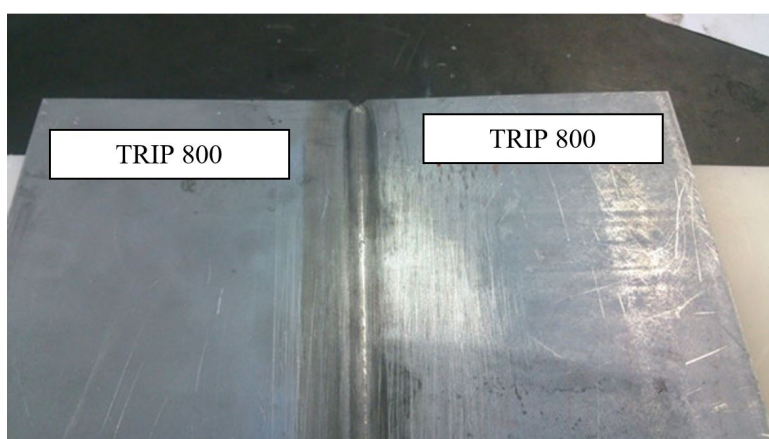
TRIP 800-TRIP 800 welding sample.
